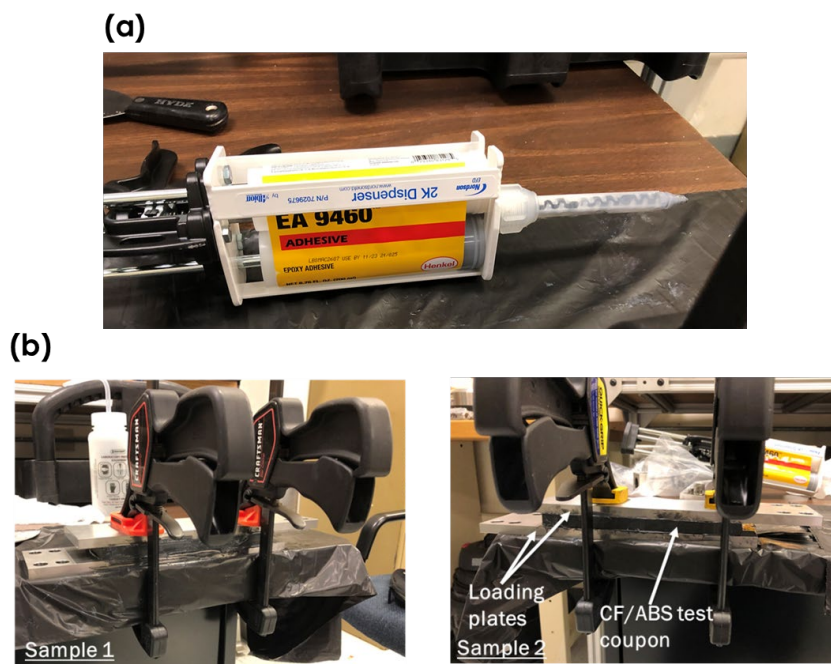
(a) 2-part adhesive used for bonding test coupon to loading plates, (b) Samples clamped for curing.
